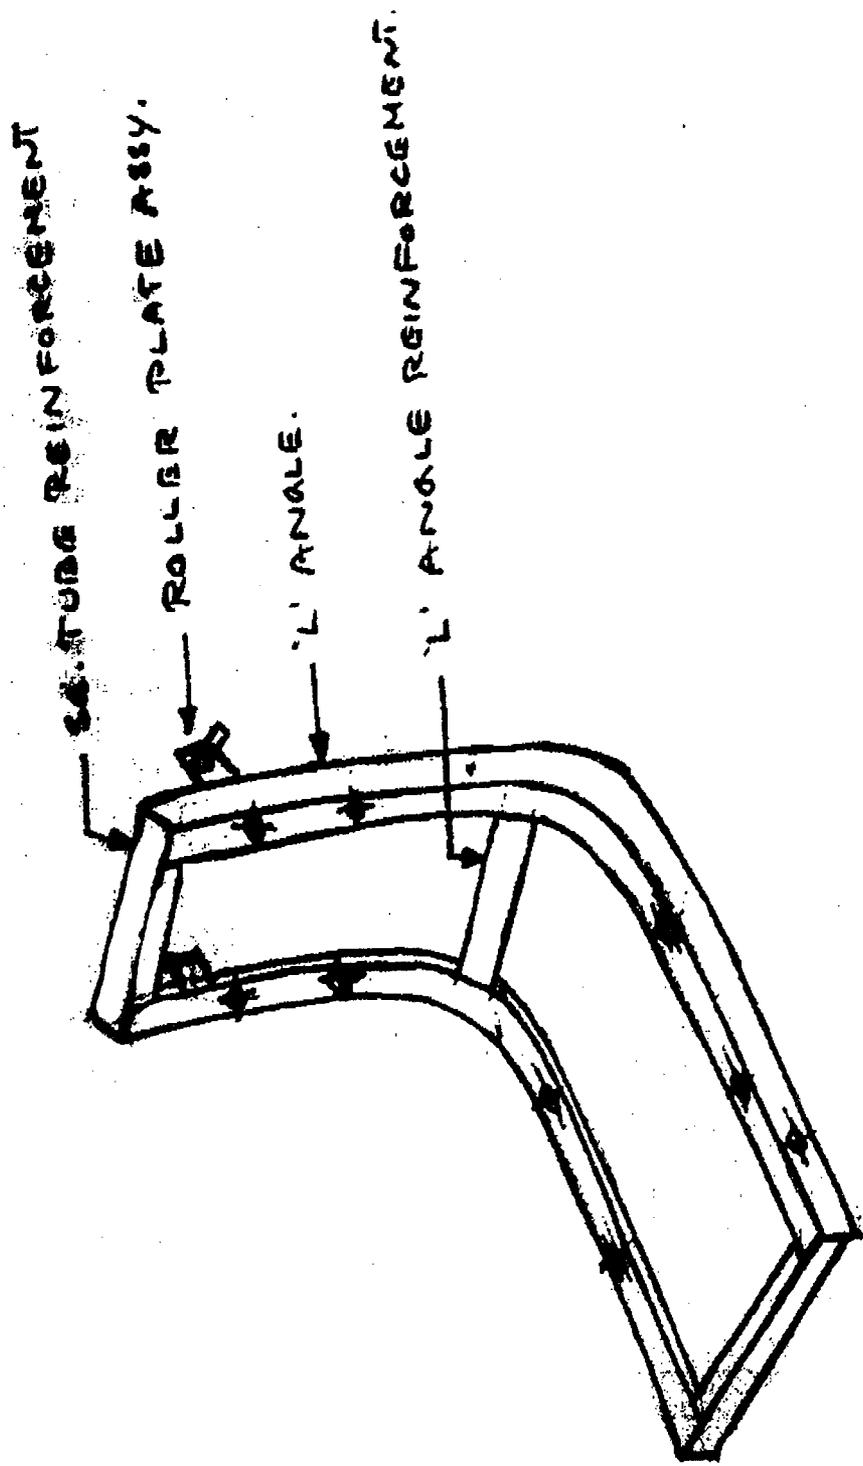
ASSY. 'L' ANGLE CARRIER PLATE
